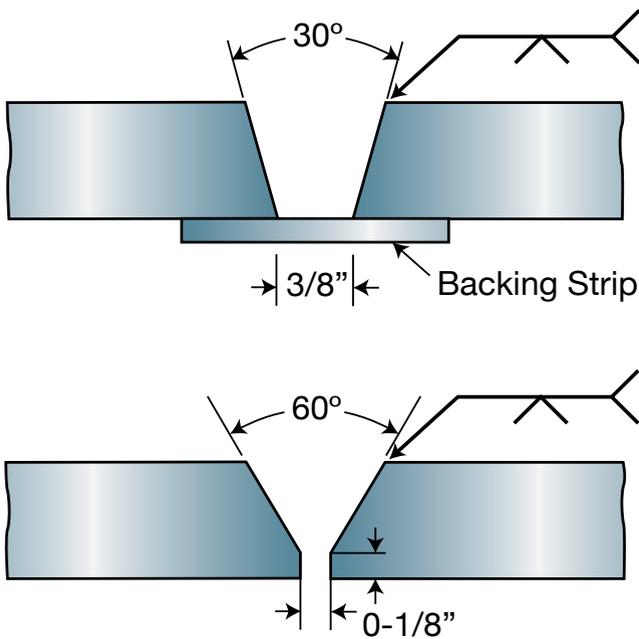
Single-V-Groove Joints with and without Backing Strip in the Same Thickness of Metal
